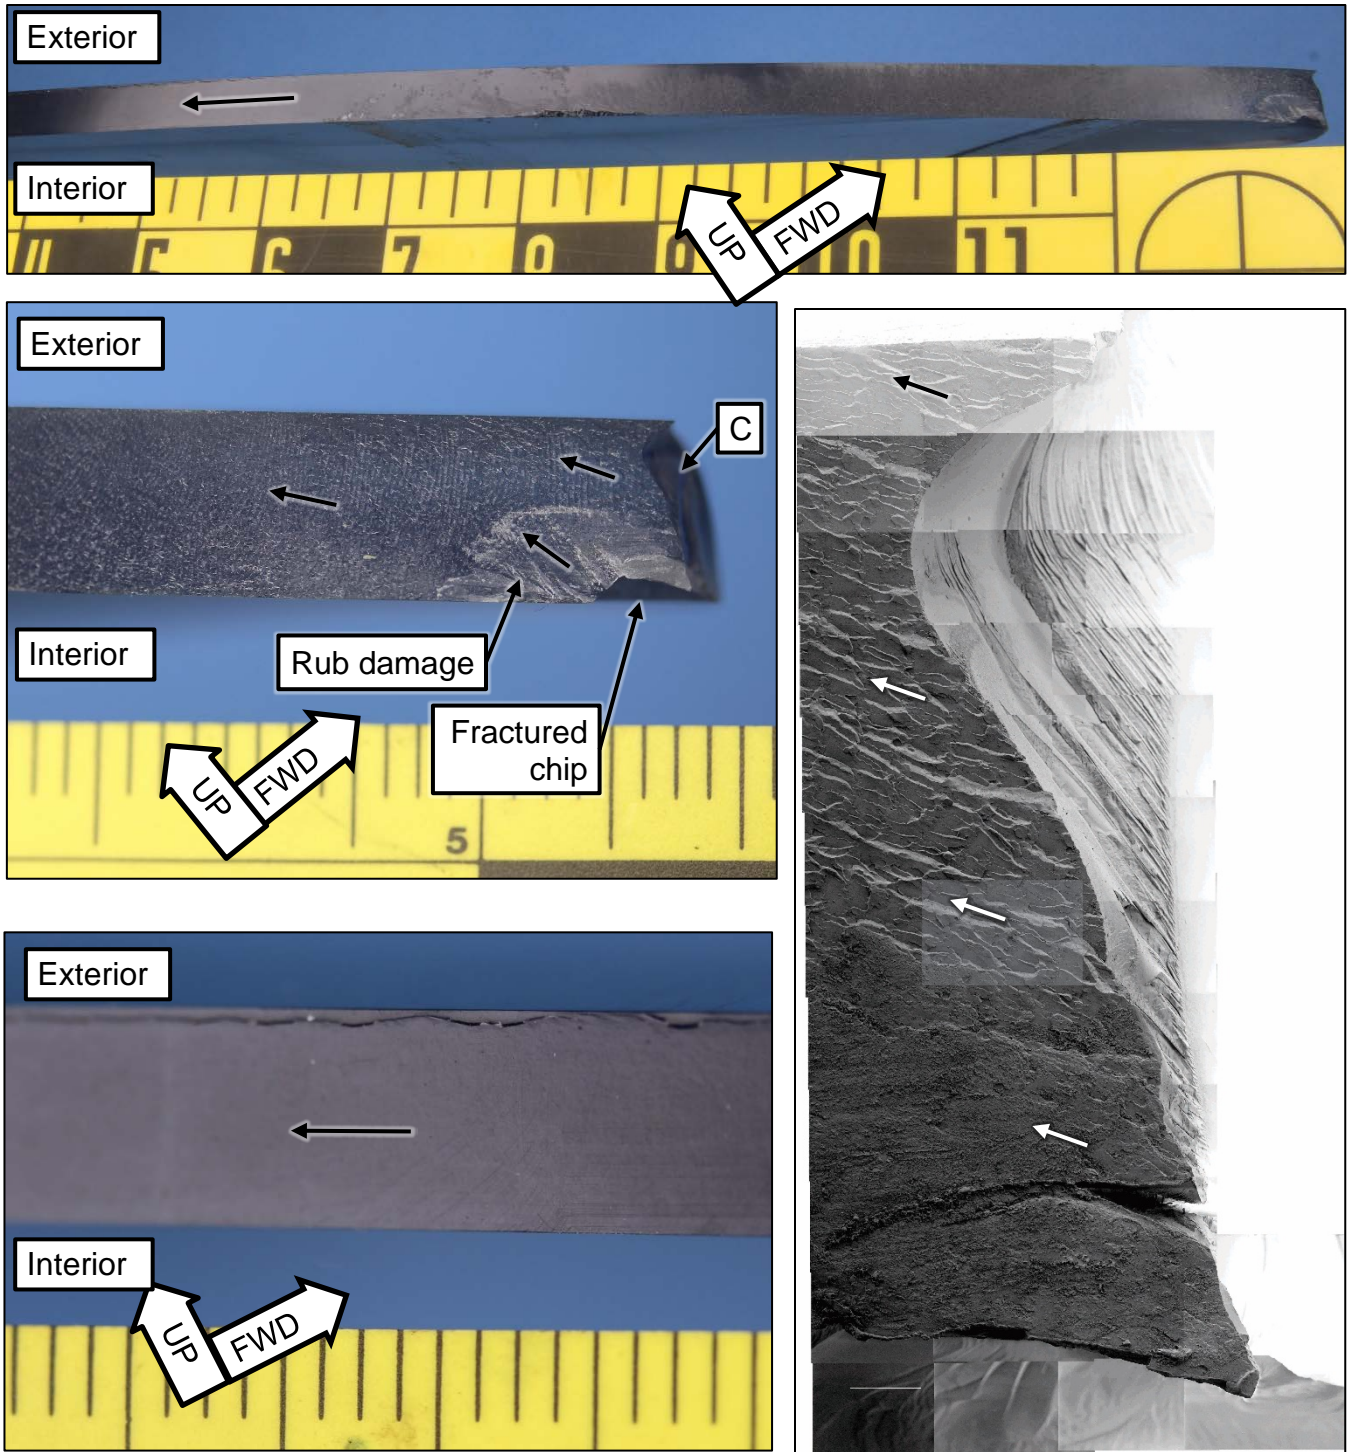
Optical images of the lower forward portion of fracture A showing an overall image (upper image), a view of the beginning of the remaining fracture (middle left image), and fracture features near the middle of the extent of the remaining fracture (lower left image). A mosaic of SEM images of the lower forward end of fracture A is shown at the right. Unlabeled arrows in each image indicate the local direction of fracture propagation.
